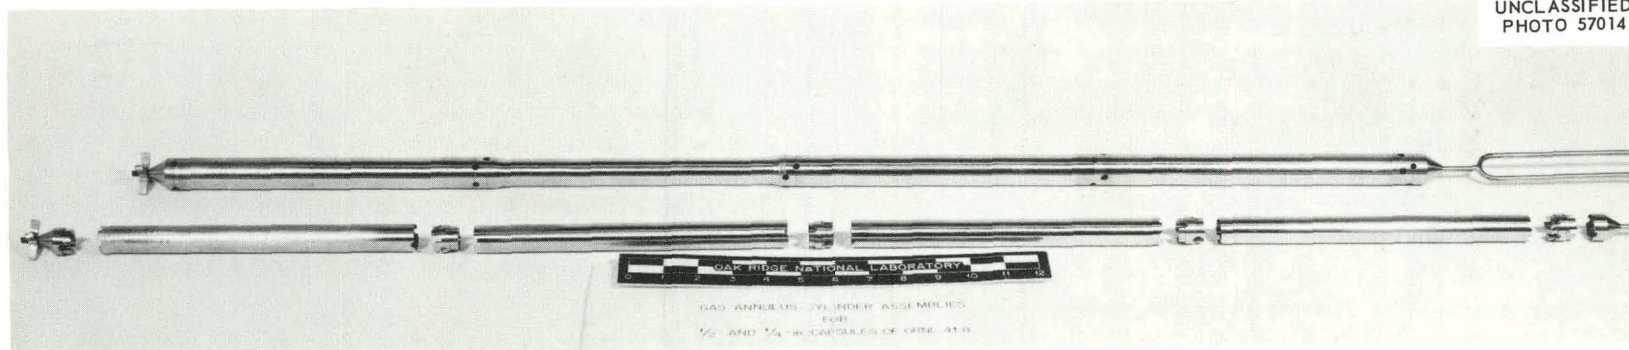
Typical Multicapsule Assembly Before Fitting with Gas Tubes and Thermocouples.
